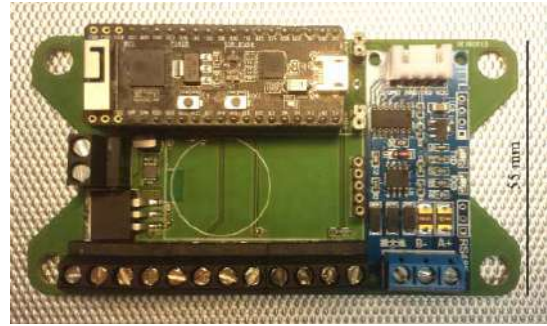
Assembled IoT-gateway PCB prototype from our defined requirements
